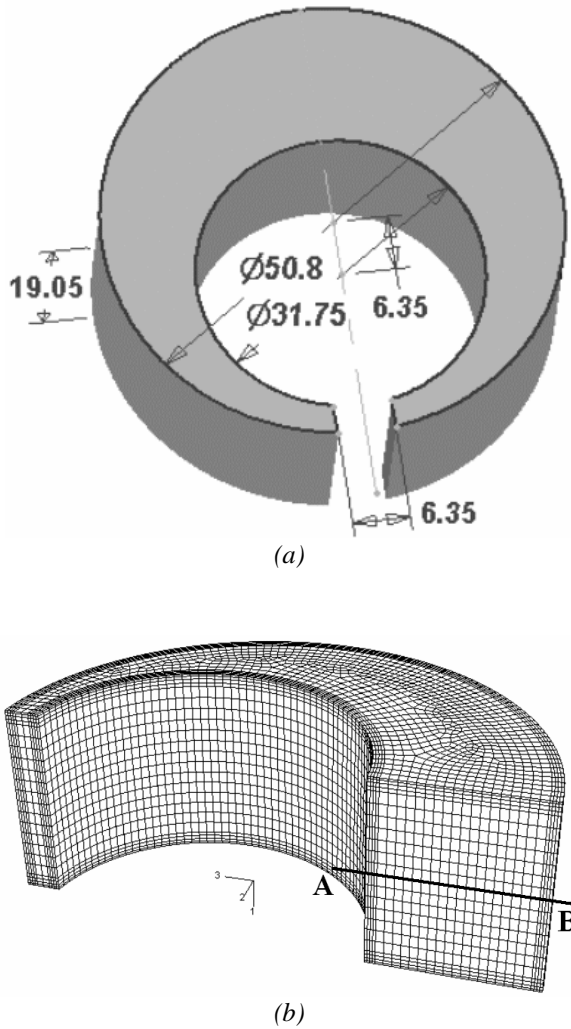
(a) C-Ring Geometry (unit: mm) (b) Finite Element Meshing.
